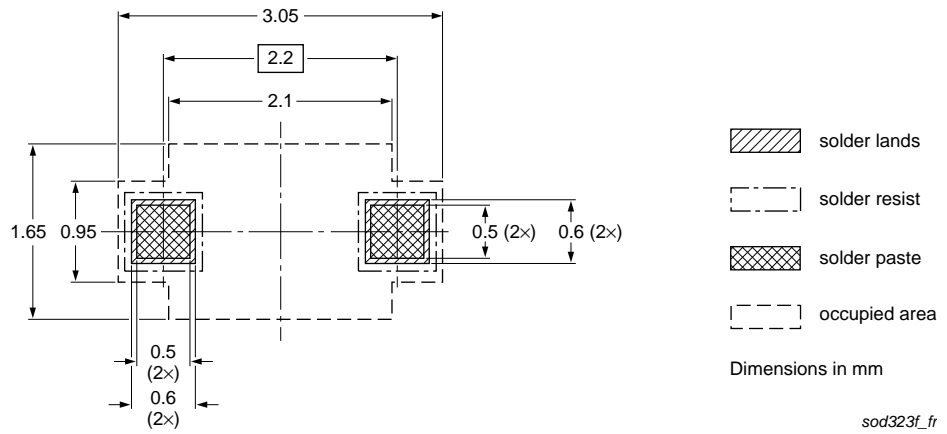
Reflow soldering footprint BAS16J (SOD323F)
